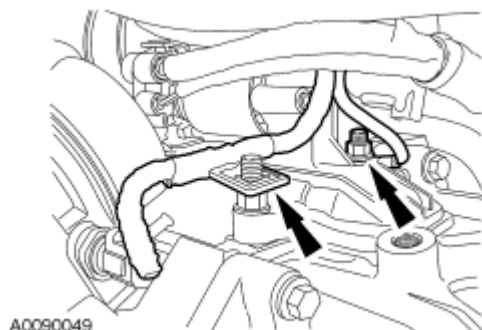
Locating Wire Harness Clip Retainer & Starter Bolts
